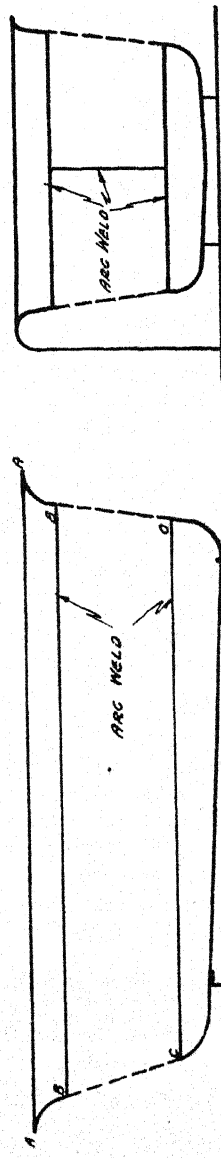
Schematic drawing of arc welded steel bath tub.
